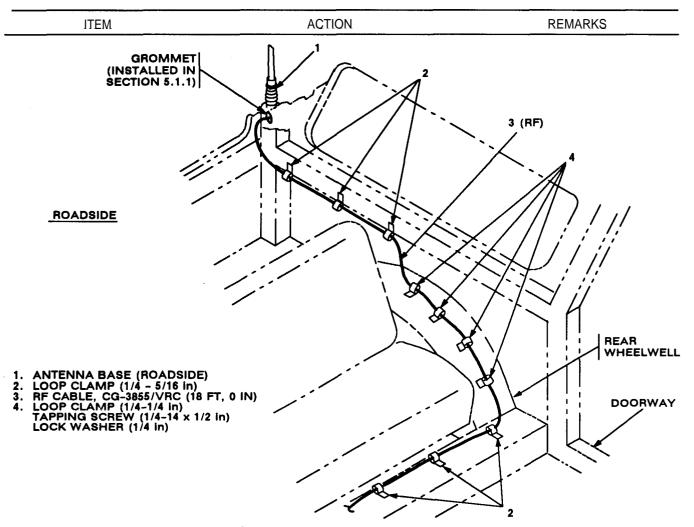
(2). Cable Installation: Rear Roadside Area
